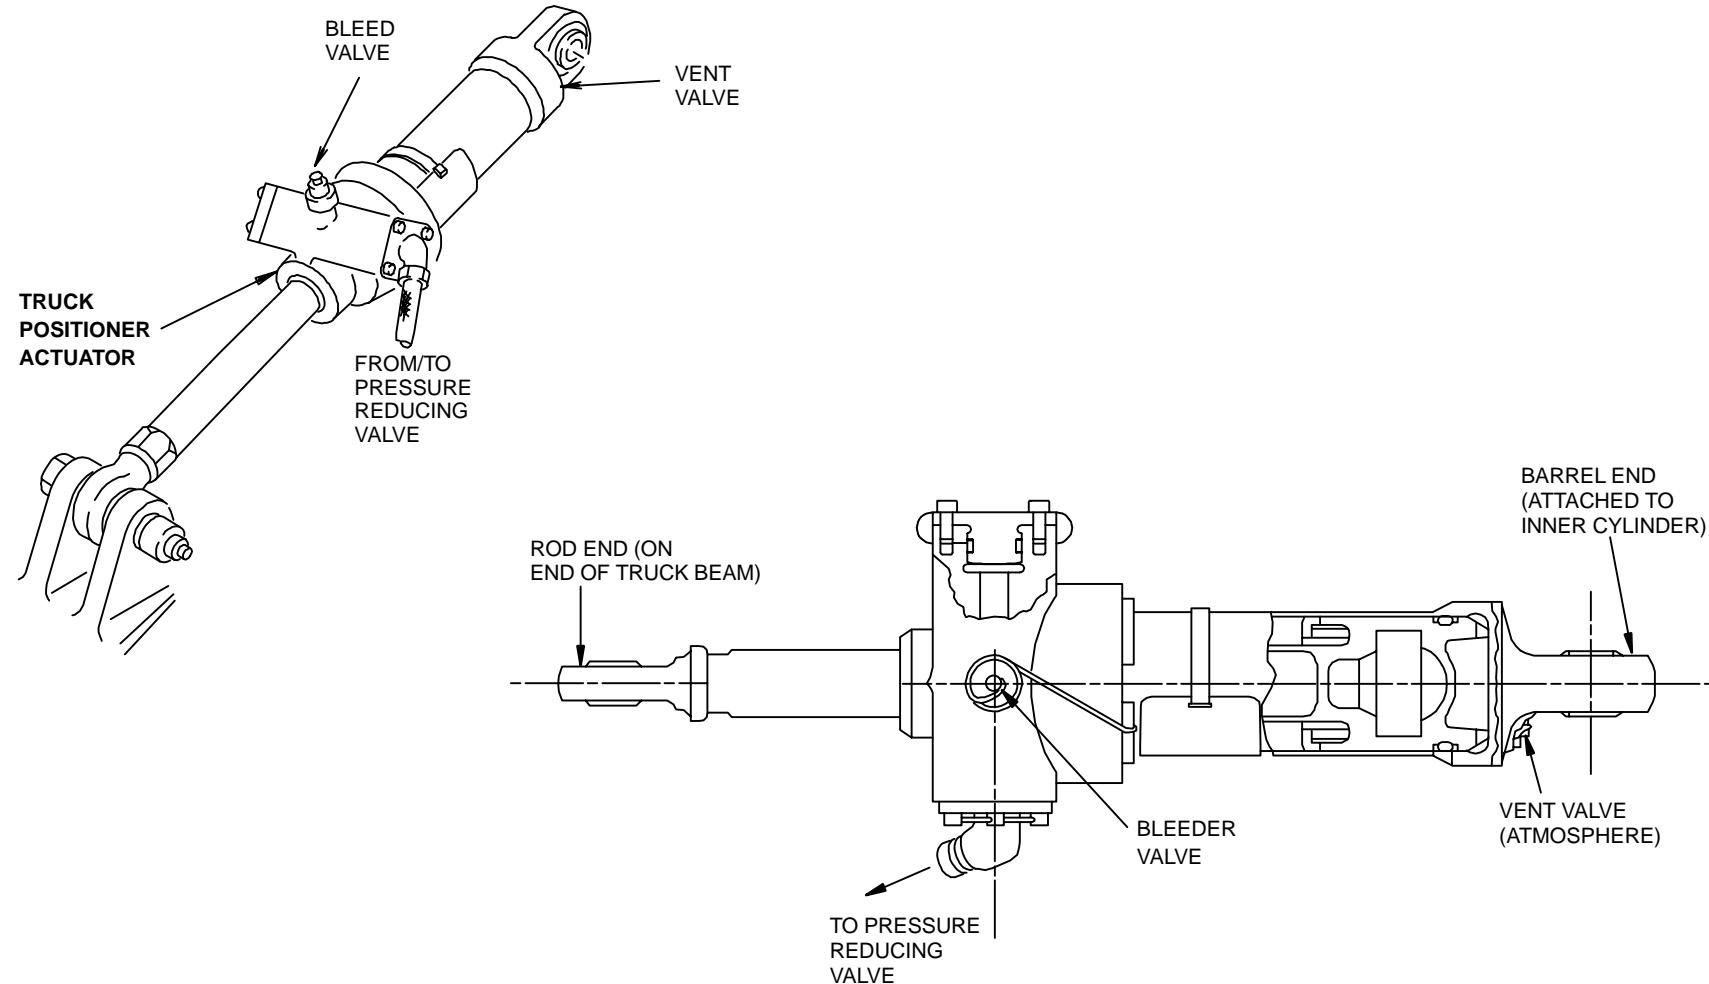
BODY GEAR TRUCK TILT COMPONENTS
